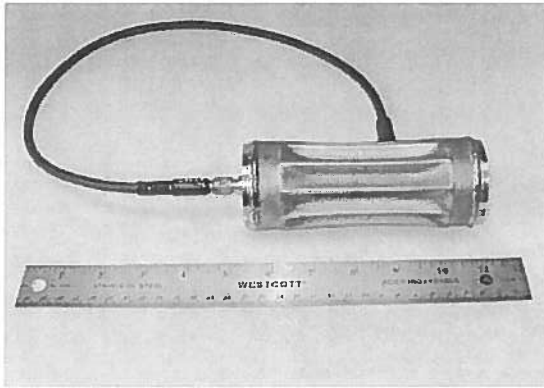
Assembled LC Ti-6Al-4V FSP with welded Ti end caps
